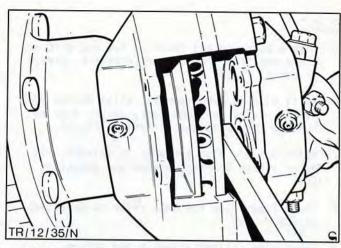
Lever caliper pistons back into bores using flat iron bar.
